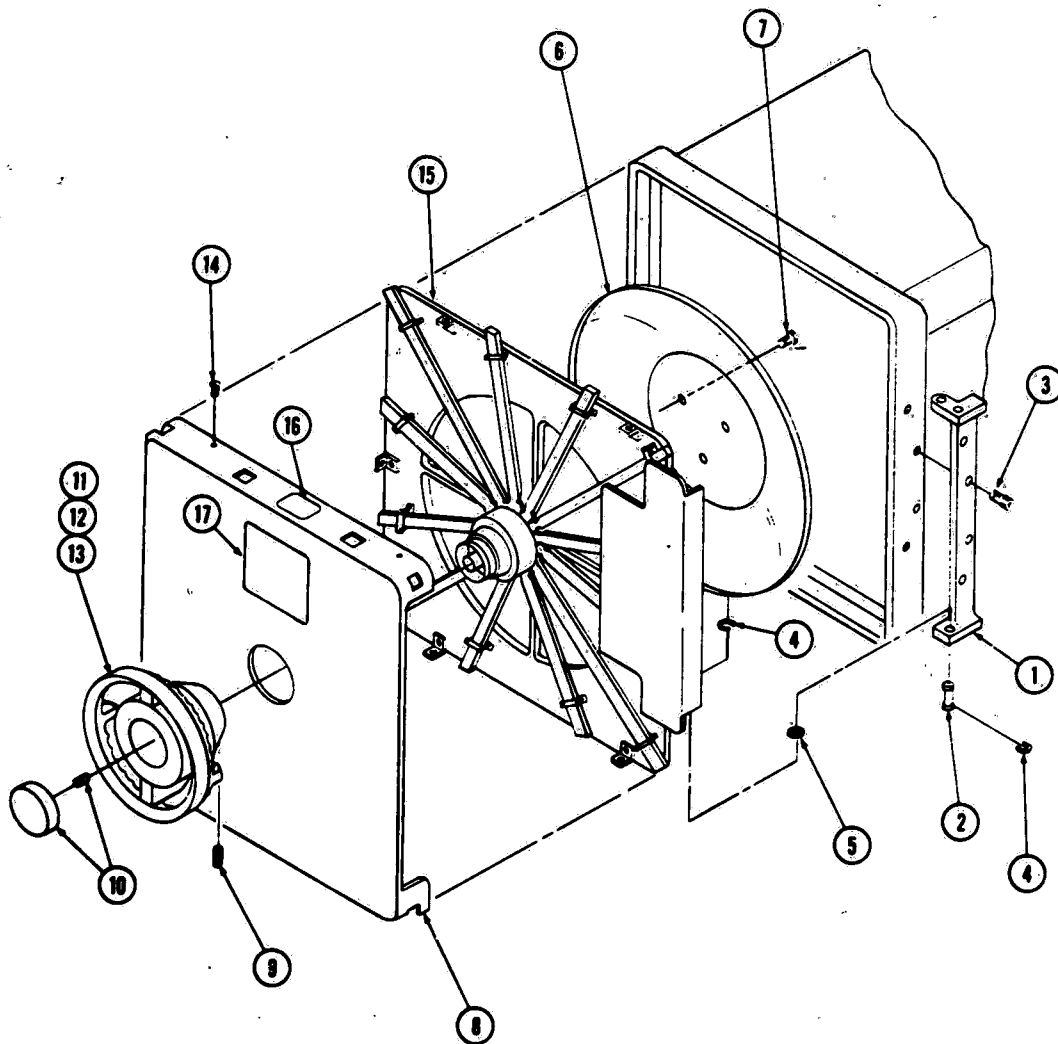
DOOR COVER AND HANDWHEEL ASSEMBLY
